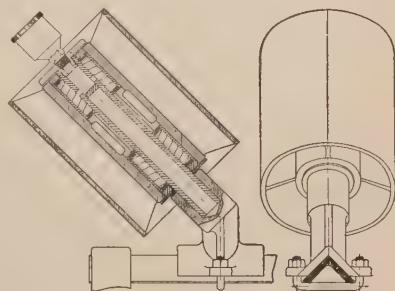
Grain Conveyor Concentrator Pulley Fitted with Roller Bearings.
